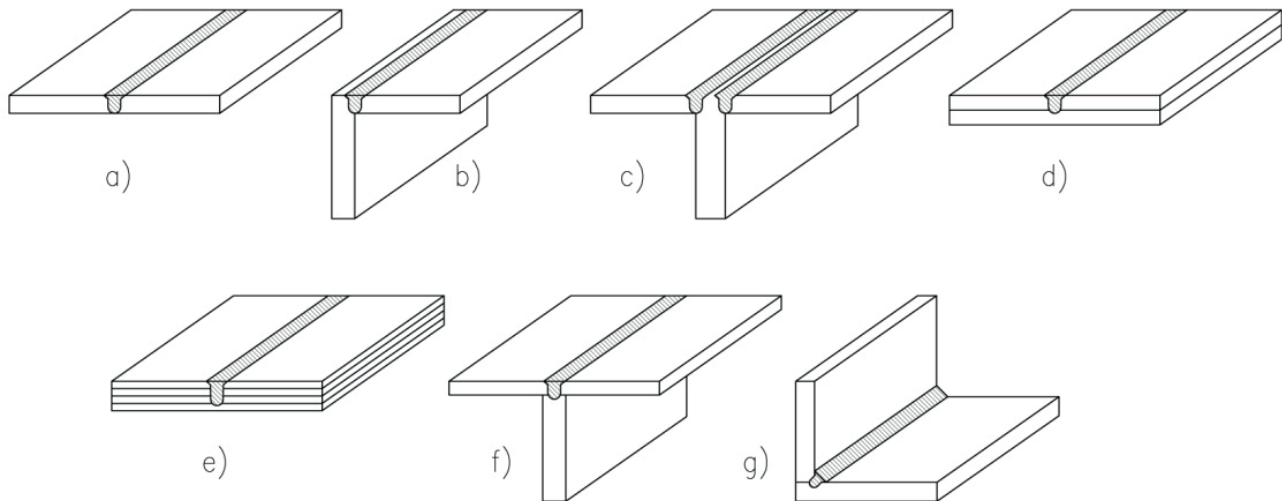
Different types of FSW joints: a) square butt; b) edge butt; c) T butt joint; d) lap joint; e) multiple lap joint; f) T lap joint; g) fillet joint, based on [4, 5]
